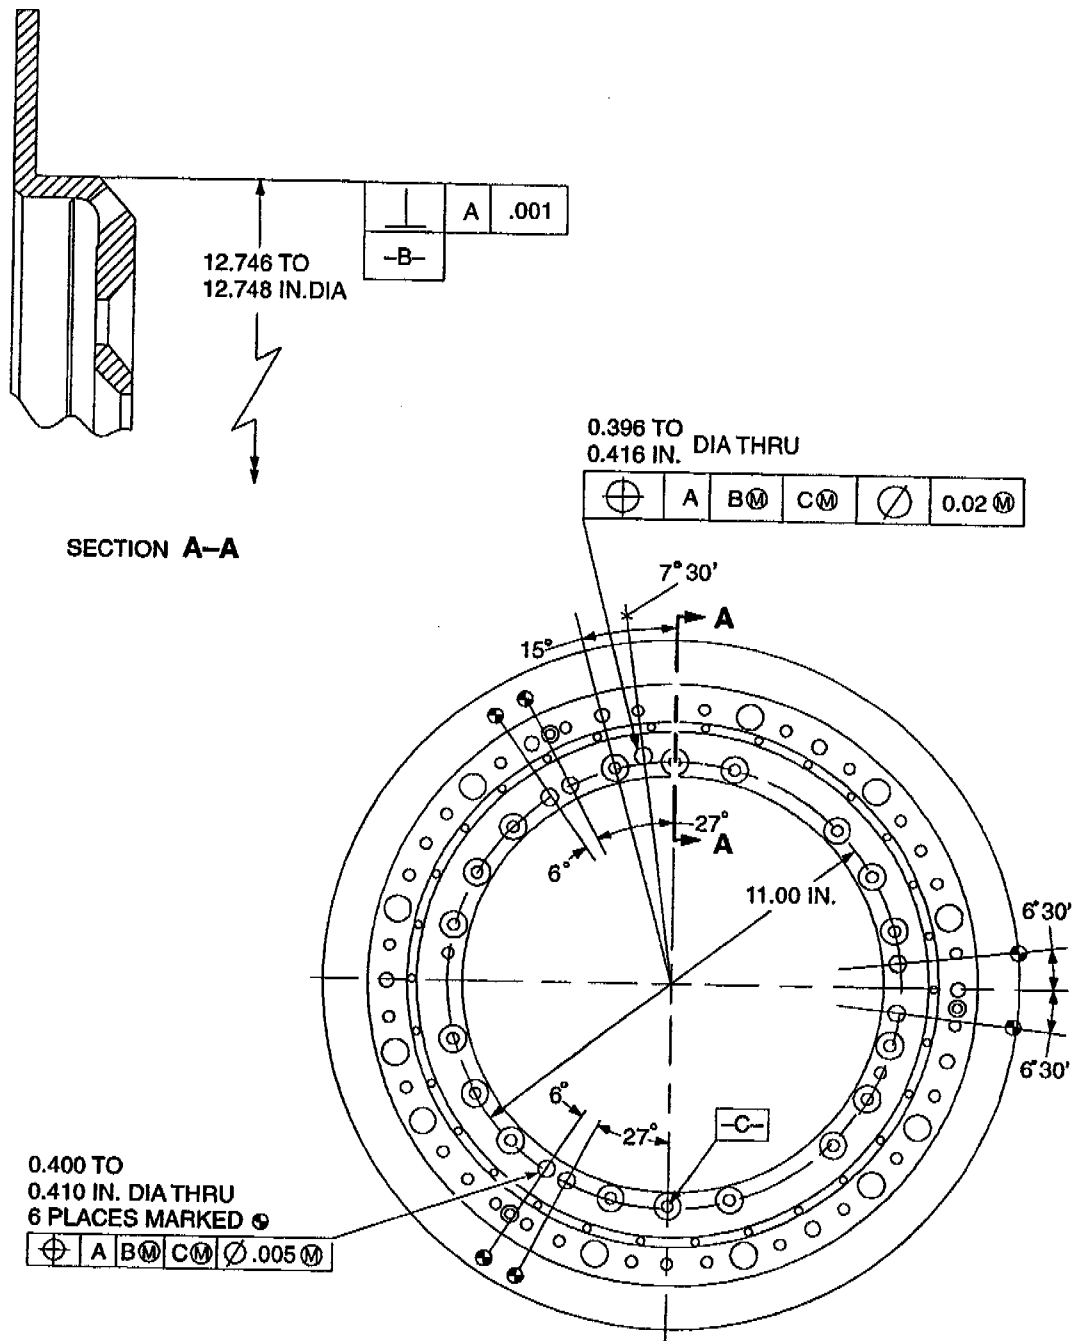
A. Rework of Torquemeter Plate Assembly (1-030-240-02 to 1-030-123-06).
